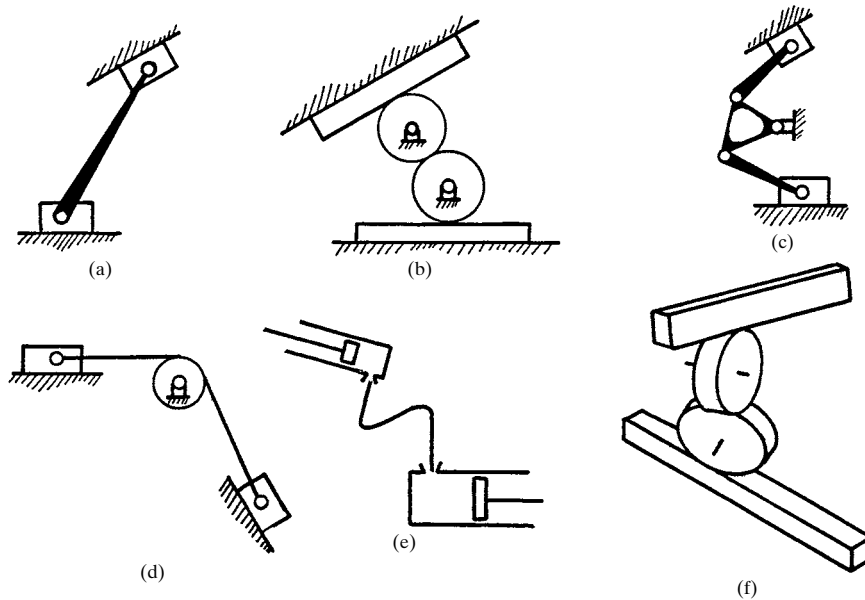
Slider connectors. These devices connect two or more reciprocating devices. (a) Elliptic trammel; (b) gears; (c) slider-crank-slider; (d) cable; (e) hydraulic; (f) helical gearing.
